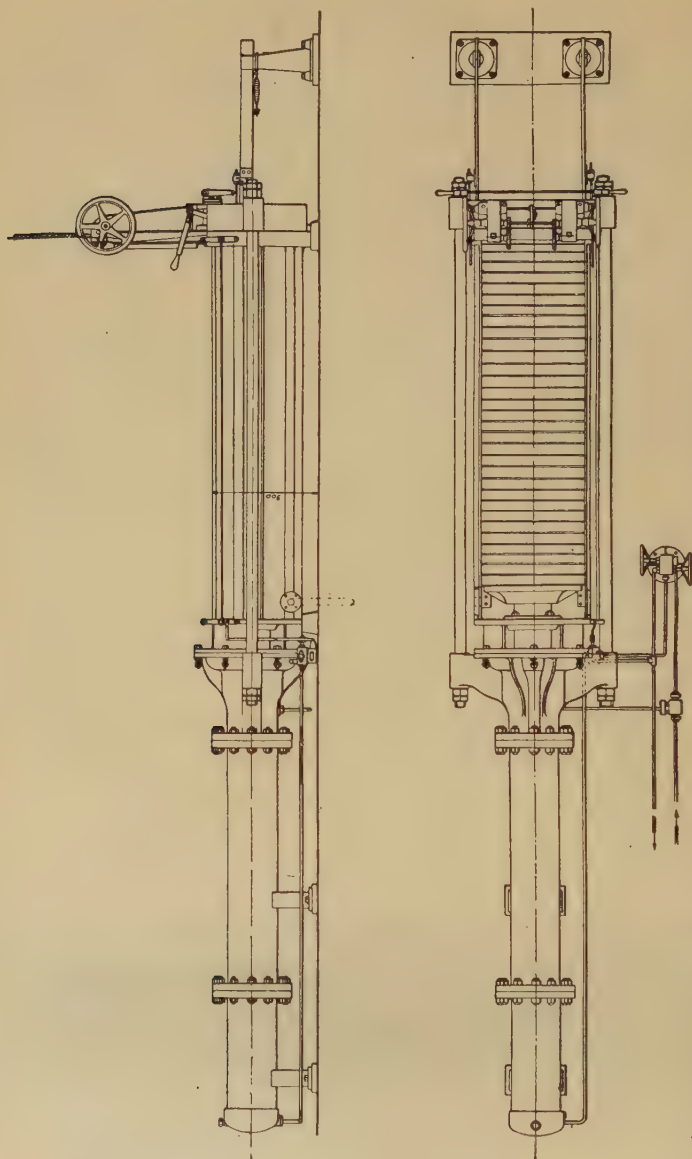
Hydraulic-Horizontal combined steeping Press. (Courtesy Ezio Pensotti, Milan.)
